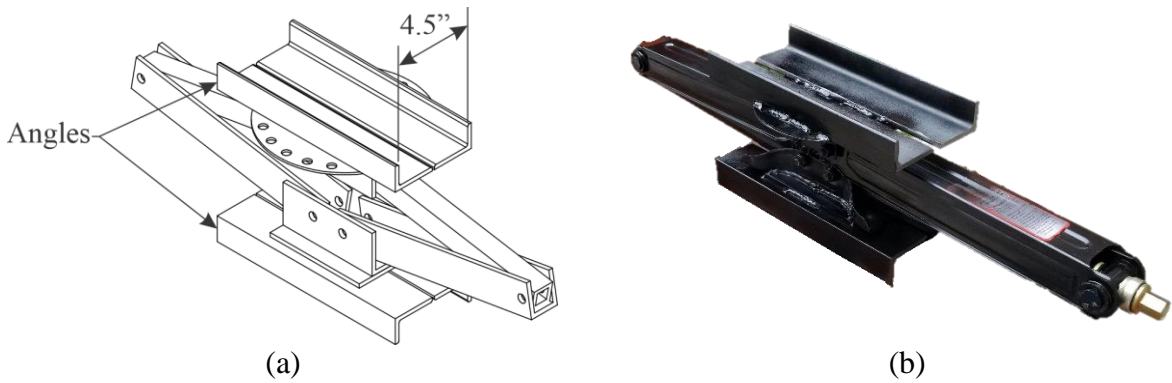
Scissor jack assembly: (a) Schematic drawing; (b) Fabricated assembly
